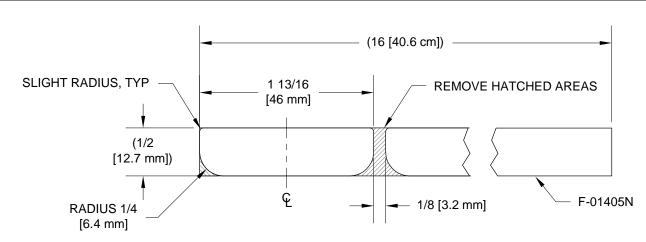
F-01405N SEAT BACK ADJUSTMENT GUIDES
